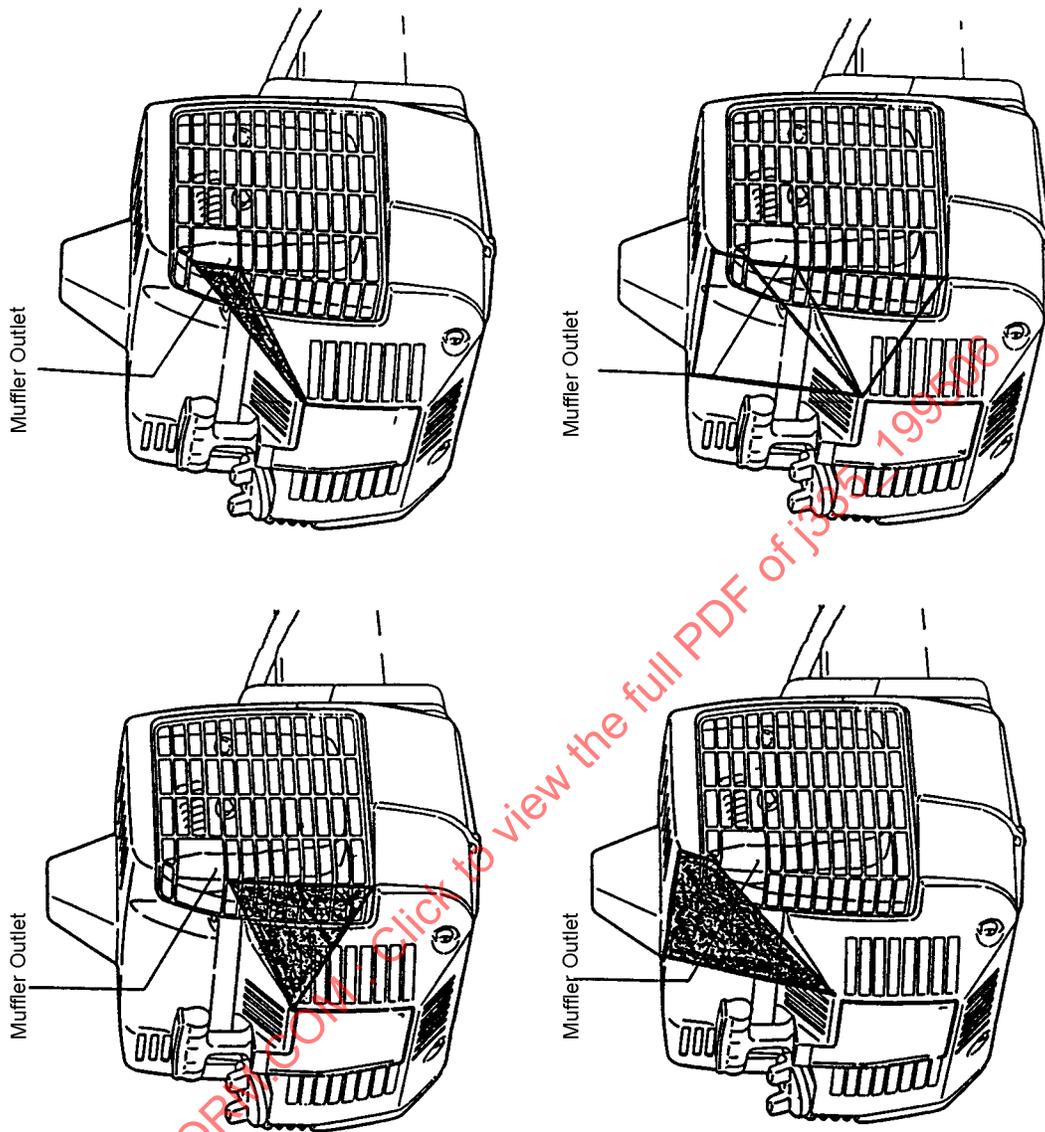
BRUSH CUTTER WITH CONTACT PLANES IDENTIFIED
